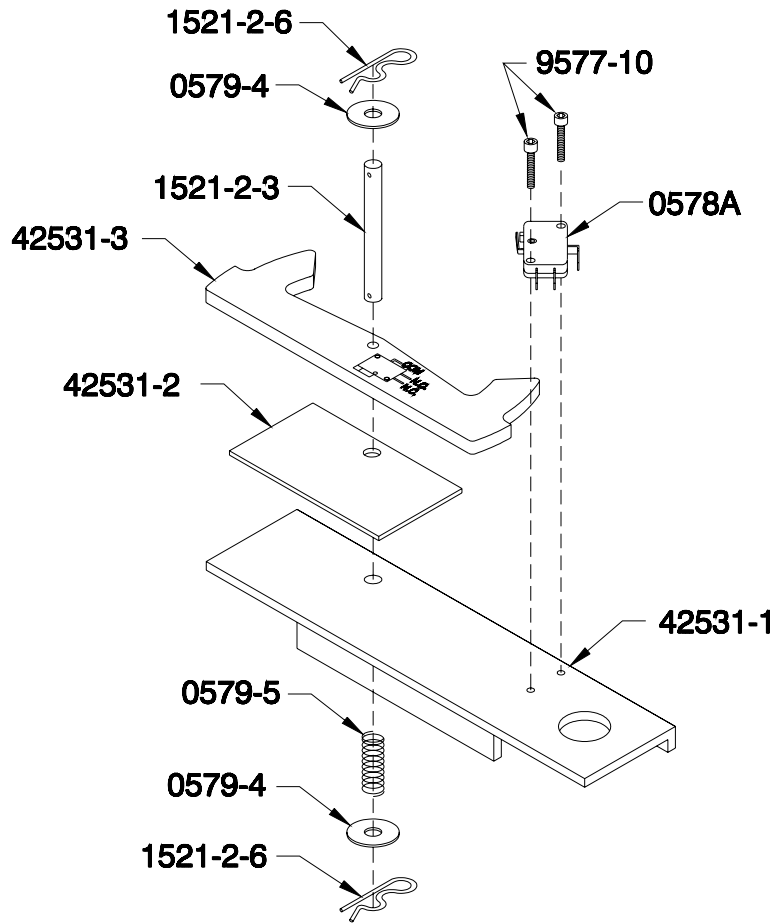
Reversing Switch Assembly (Part No. 42531), Exploded View
